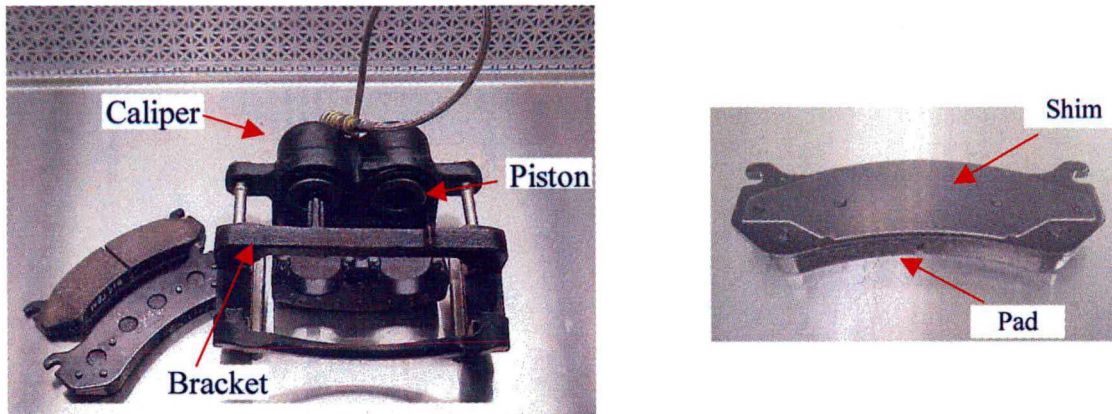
Caliper disassembled and detail of a pad with shim
